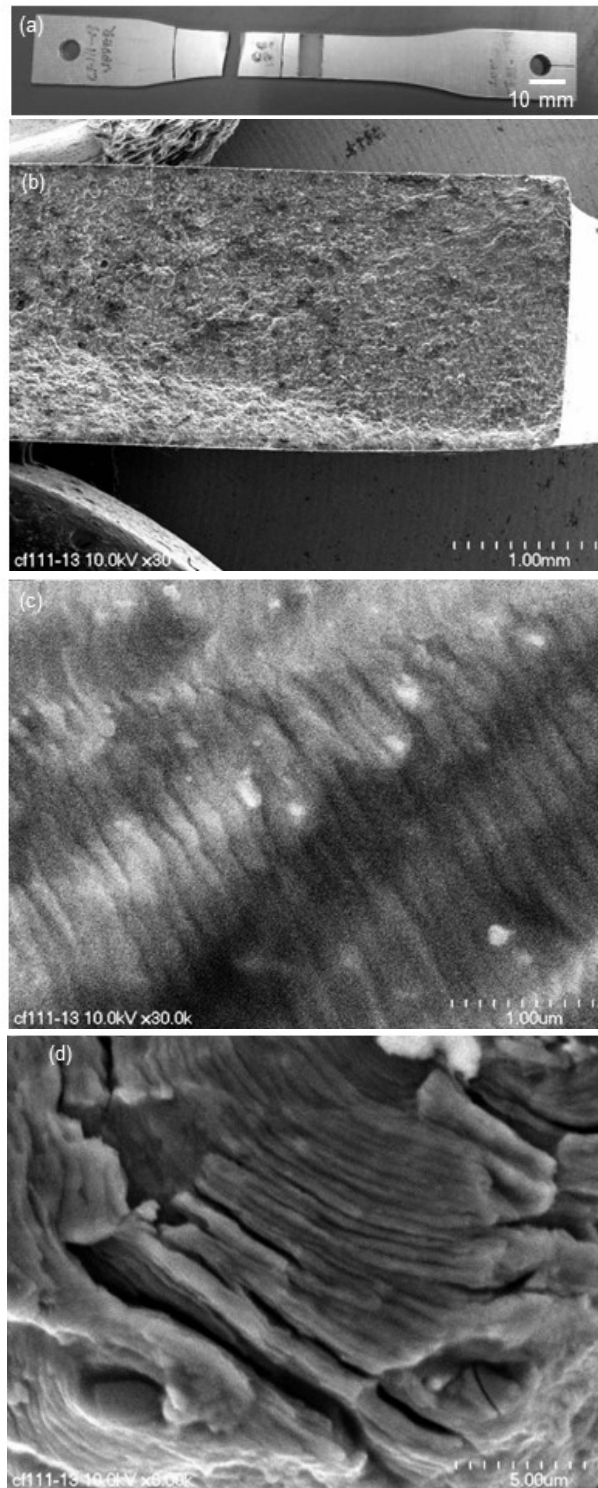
Fracture surface when the edge within the base material is the origin of fracture ( $\Delta\sigma = 180$  MPa, failed at 299k cycles) (a) top view, (b) fracture surface between the edge and the final failure surface, (c) 1.54 mm from the origin of fracture, and (d) 2.61 mm from the origin of fracture
